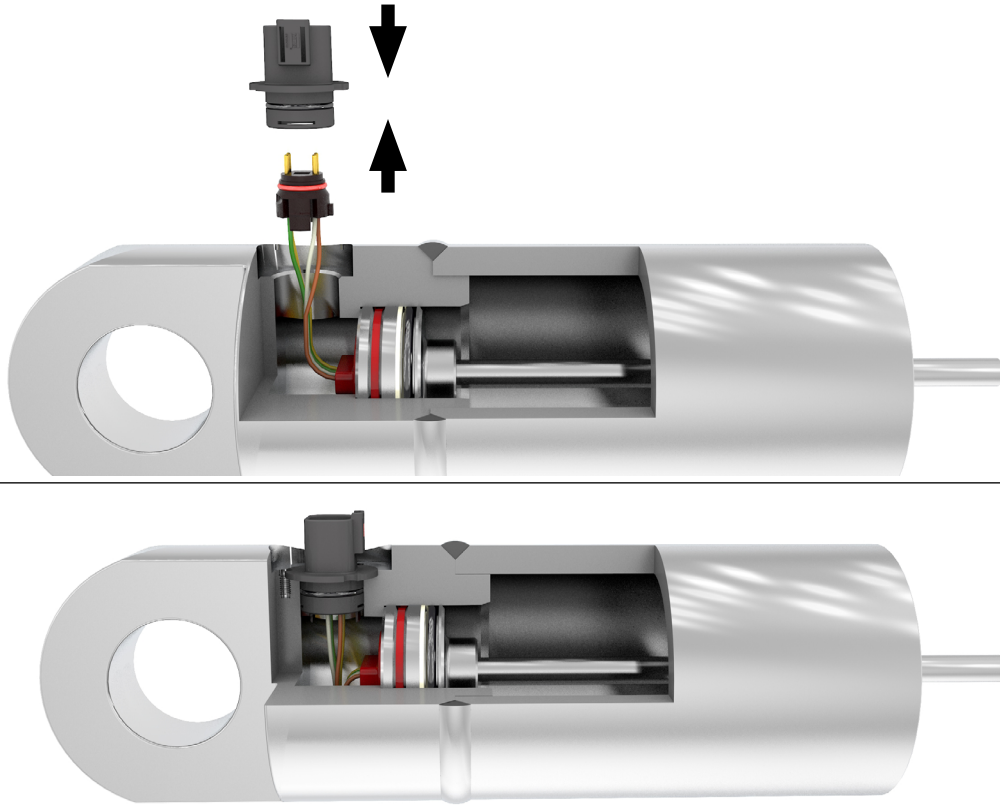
Mounting sensor with DT Connector - fixation via screws, part 1
